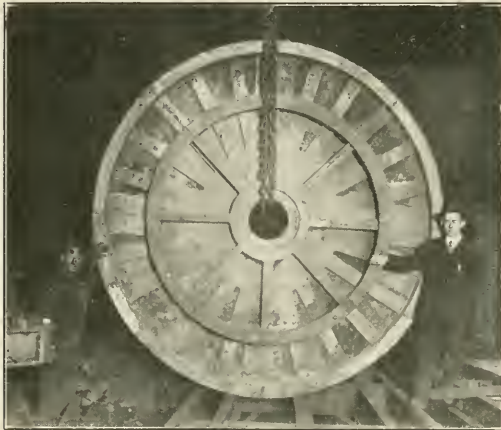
Cast-Iron Table of Boring Mill Saved by Welding
